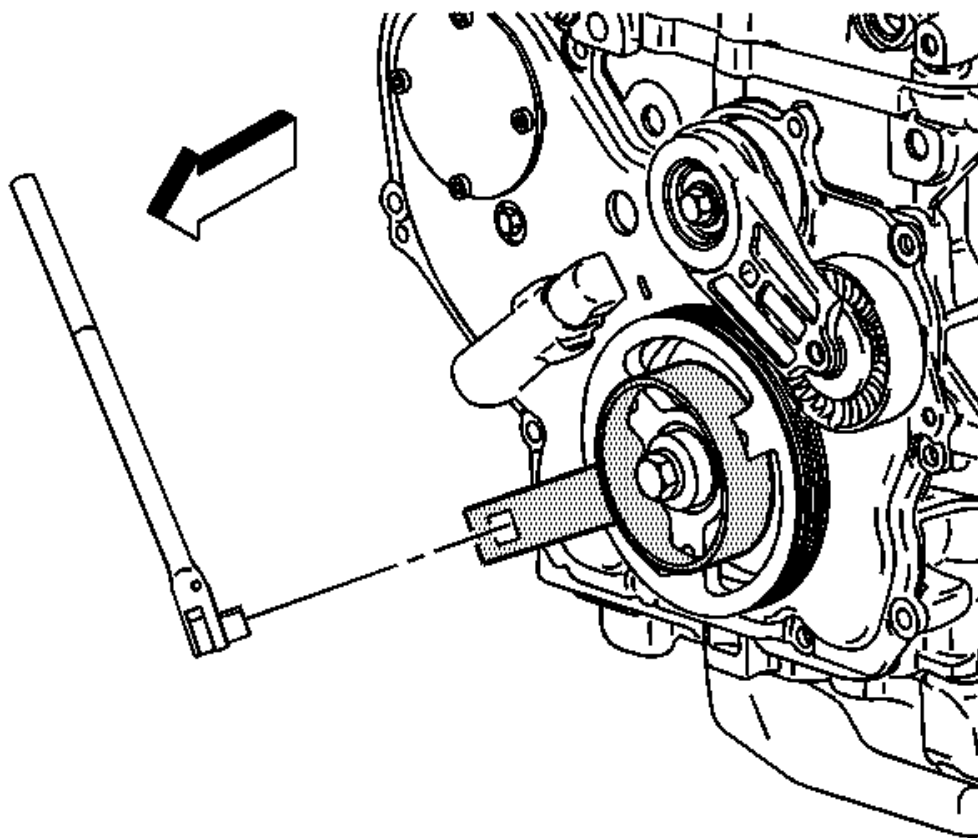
View Of Harmonic Balancer Holder J38122-A
